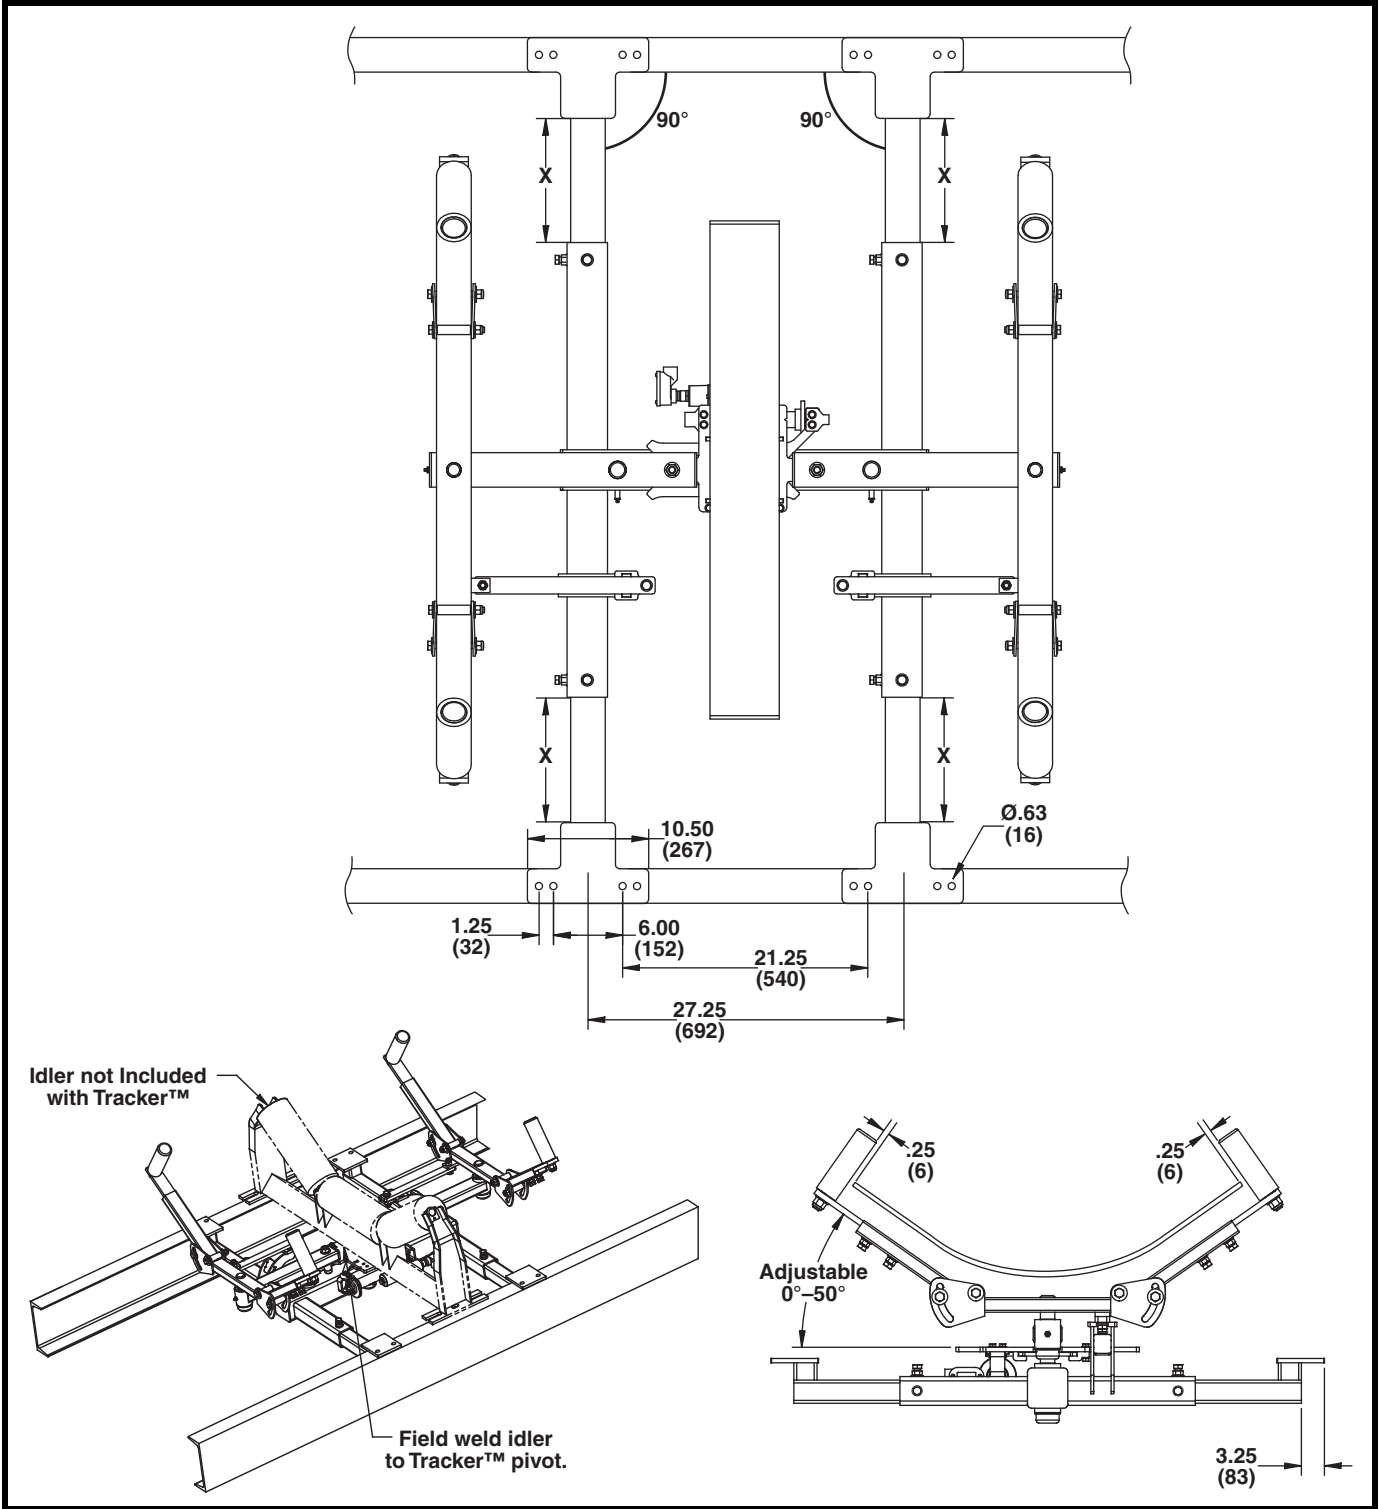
Mounting Dimensions–Martin® Tracker™ Reversing HD (Upper Unit)
